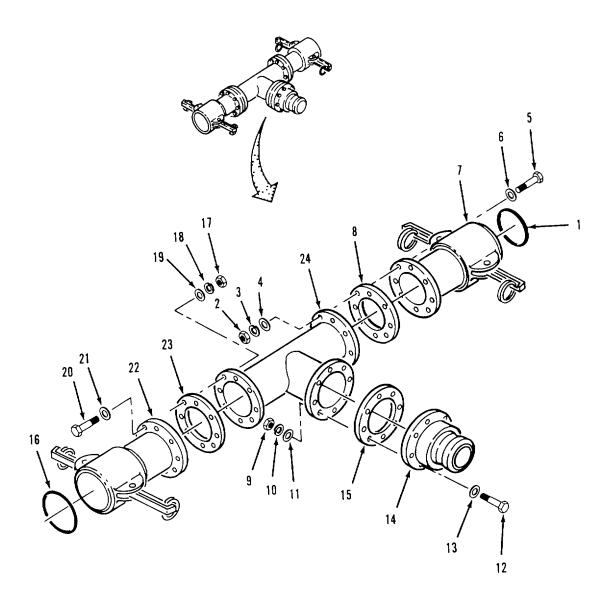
Tee Assembly (9112-Y1) Assembly.
